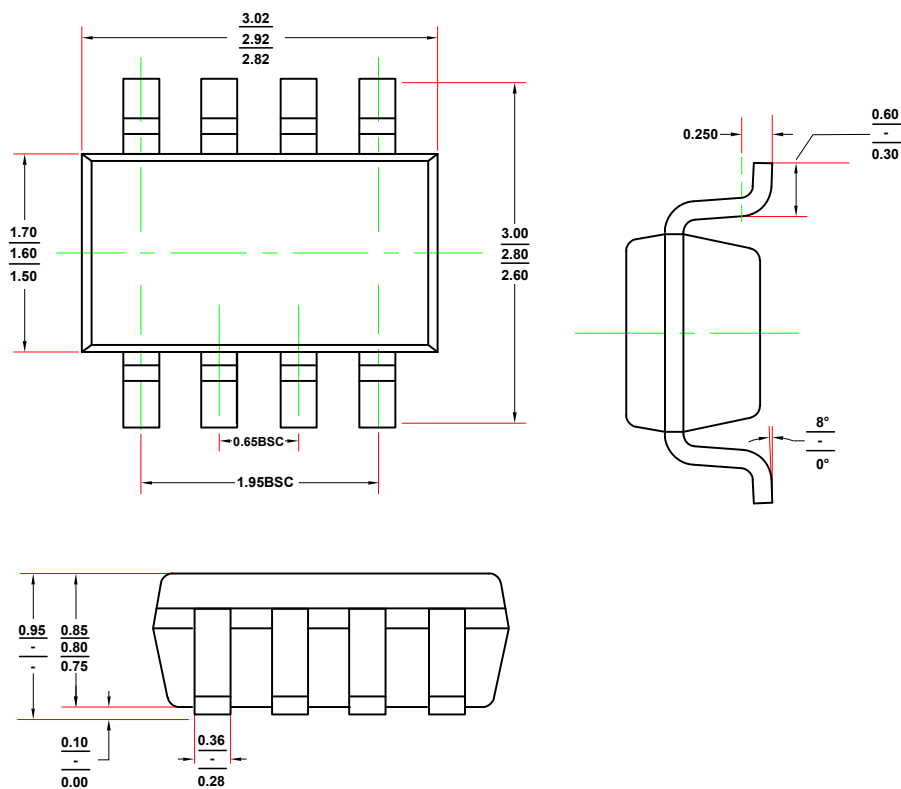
8-Lead TSOT23 Package Dimensions shown in millimeters
